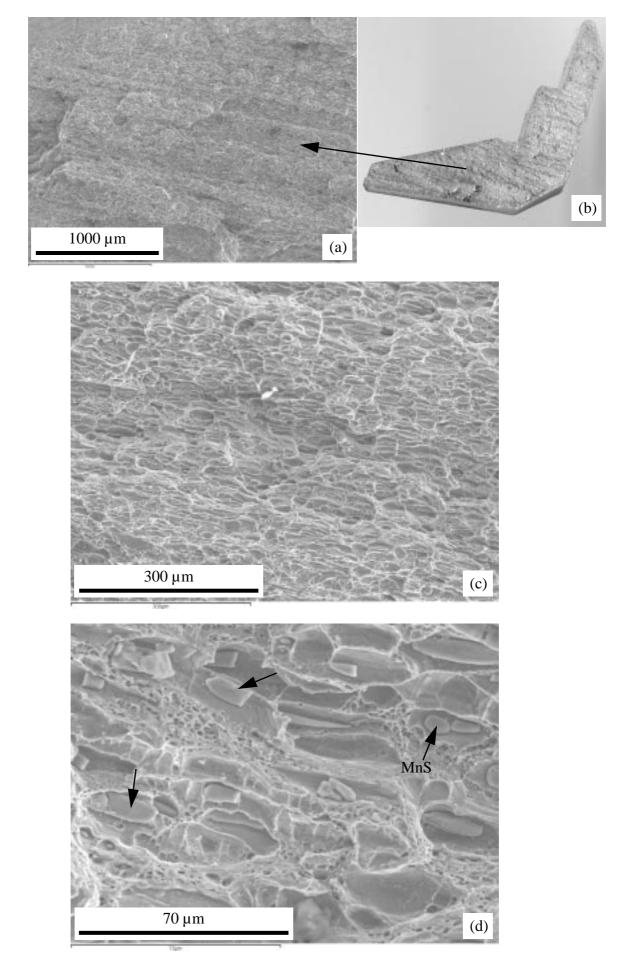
Fracture surfaces of the crack in the spring seat of the cylinder 4 (fig. 2g). SEM.
